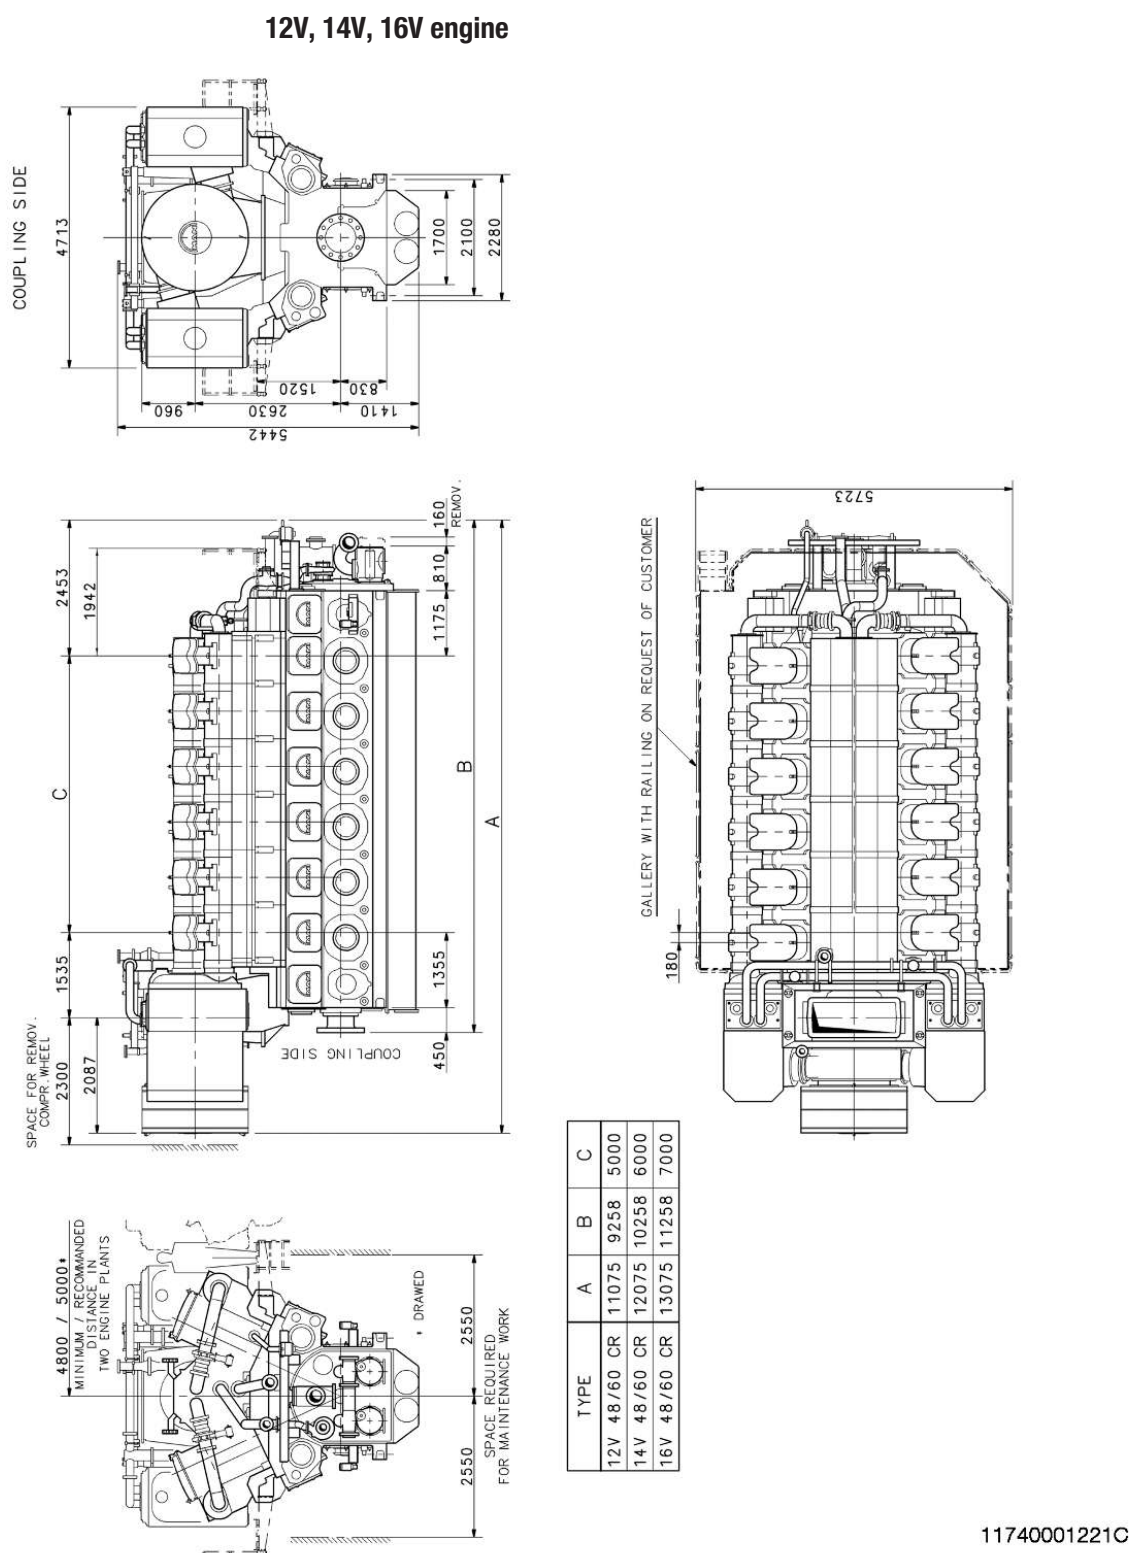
Installation drawing 12V, 14V, 16V engine – Turbocharger on coupling side
